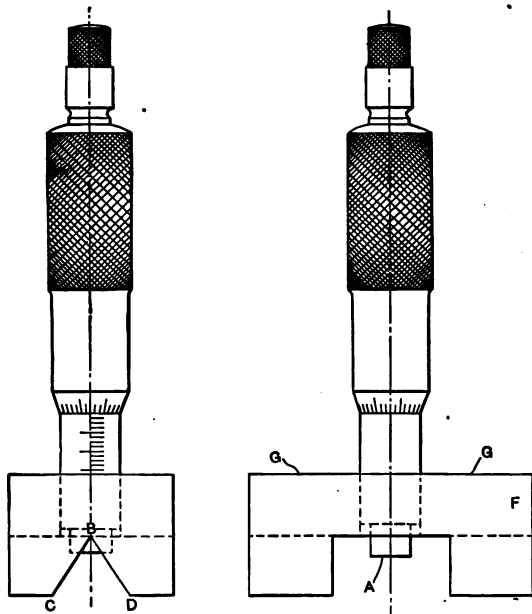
Micrometer for Measuring Flat of Thread Tools
